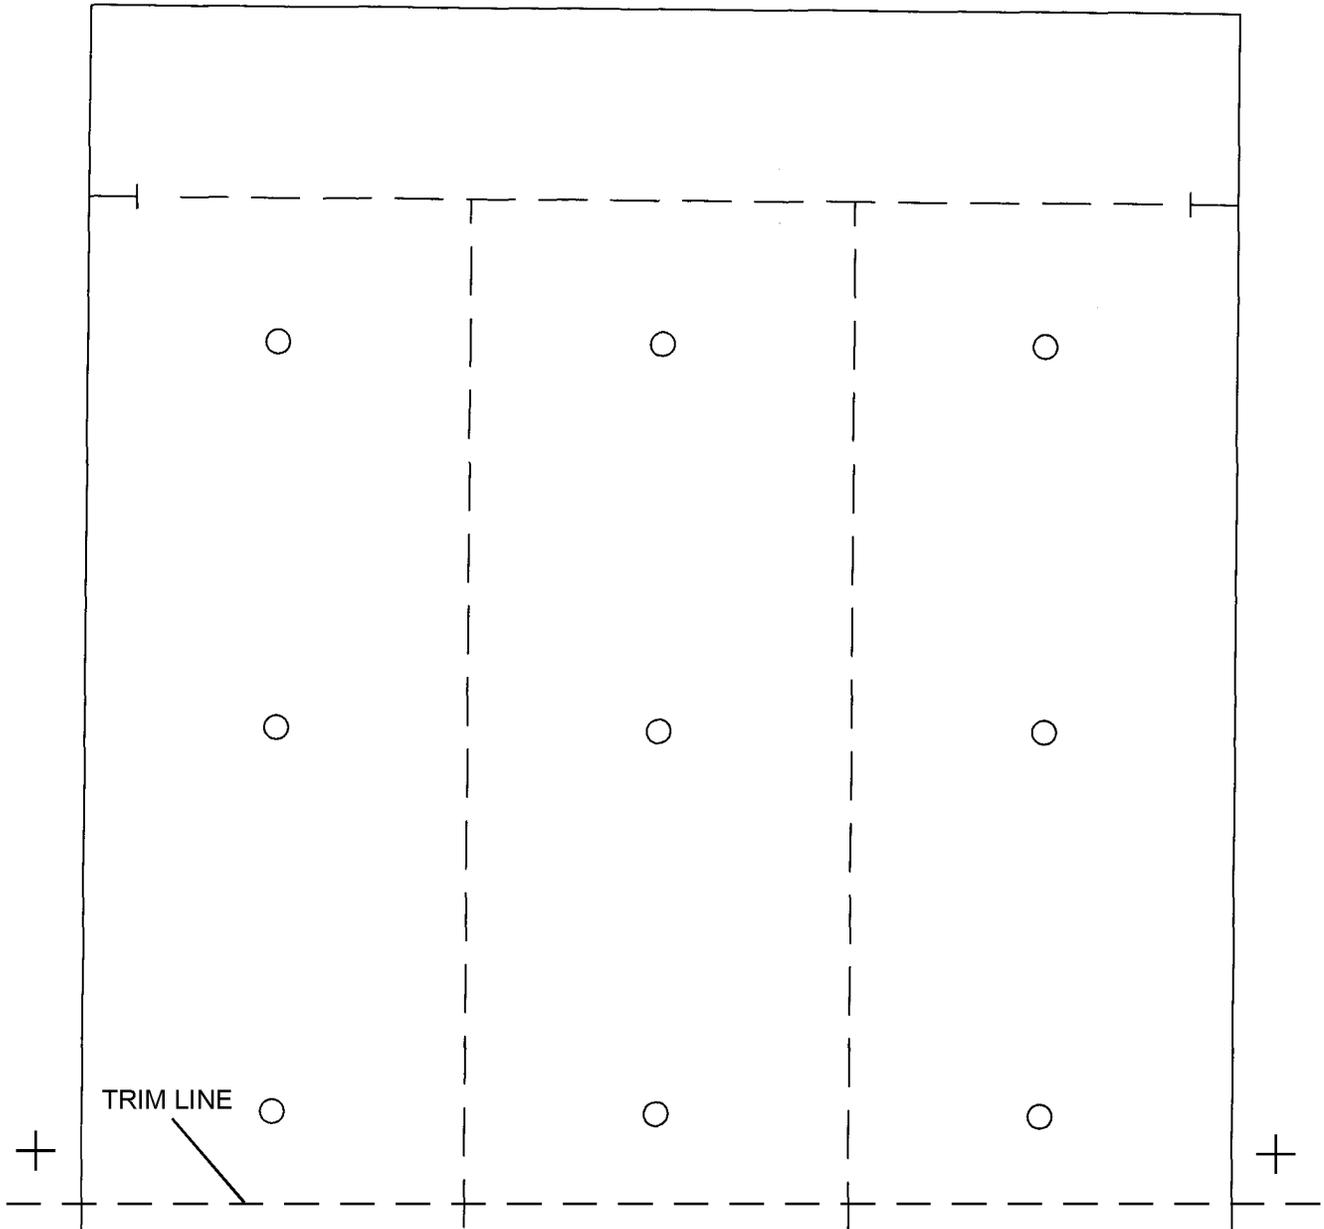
Pistol Pocket Snap Fastener Panel Pattern (Sheet 2 of 2)
